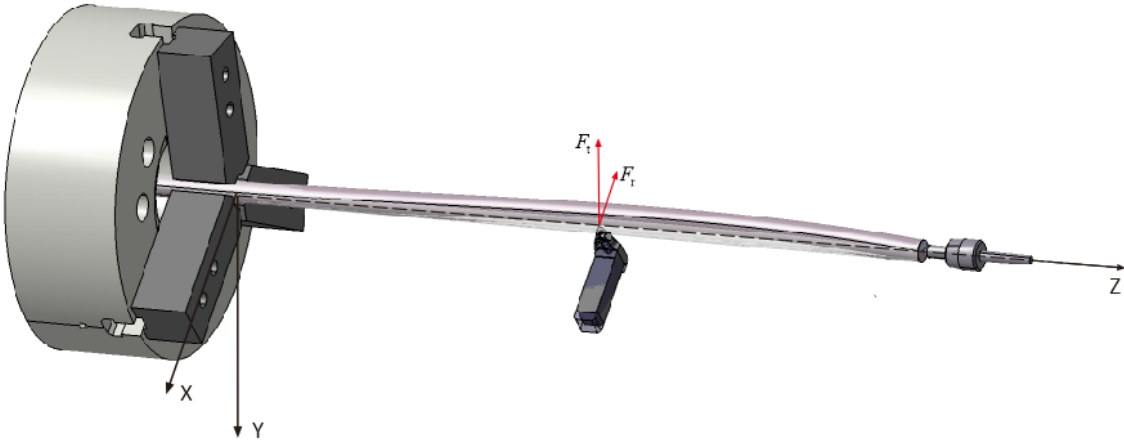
Deflection caused by cutting forces in slender shafts turning processes
